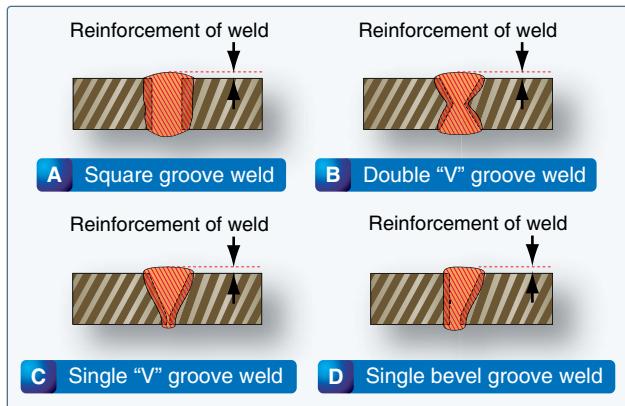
Groove welds on butt joints in the flat position.
